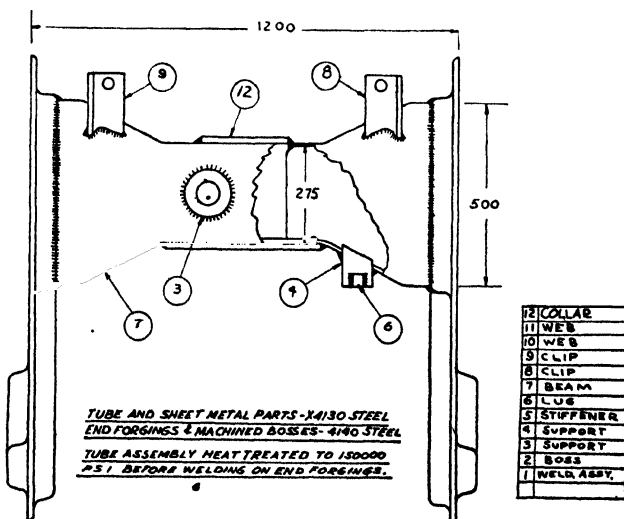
Side view of landing gear support with cut-away to show interior welding.
